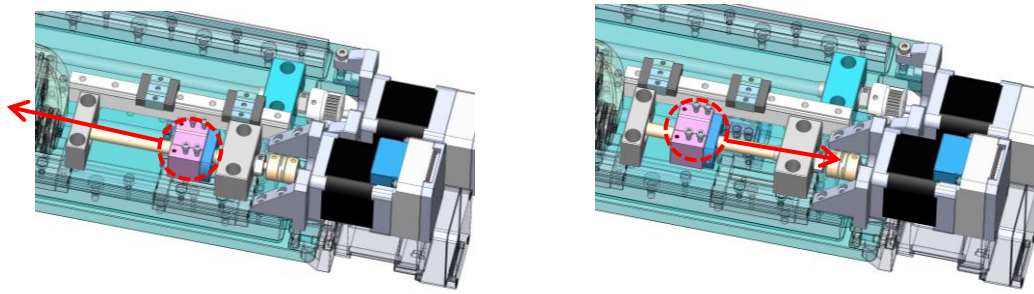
An example of L-Motor-4 and rotational Joint-4 tilting
